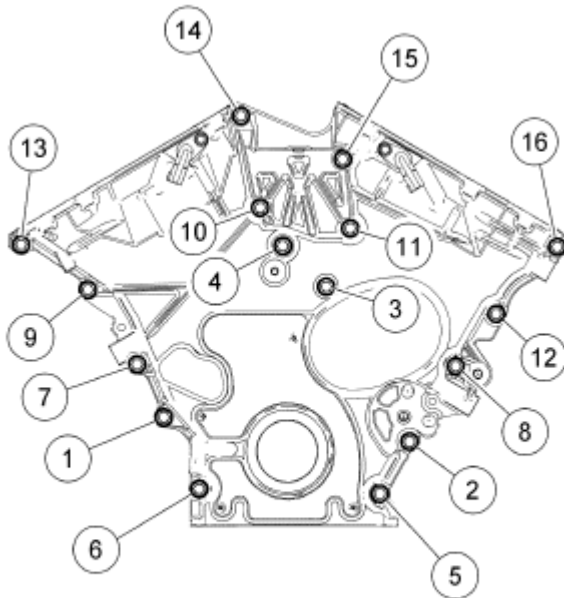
Locating Tighten Sequence Of Engine Front Cover Bolts
